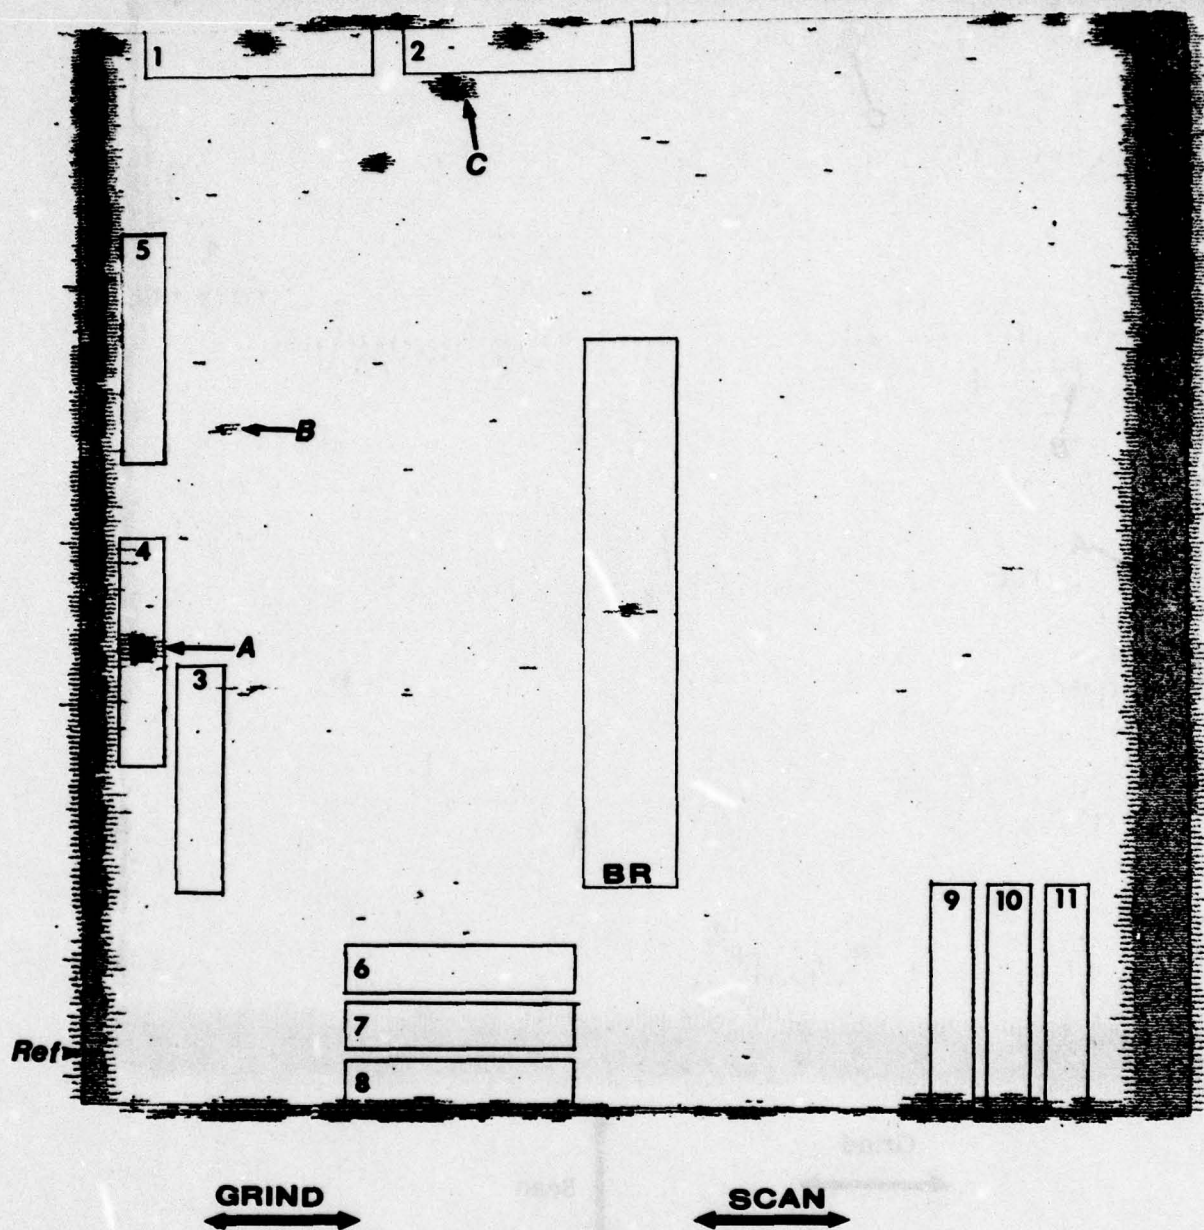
C-scan Recording of 45 MHz, 18° Surface Wave Inspection of Top Surface of Billet of Ceralloy 147A HPSN After Machining (Scan Parallel to Grinding Direction).
